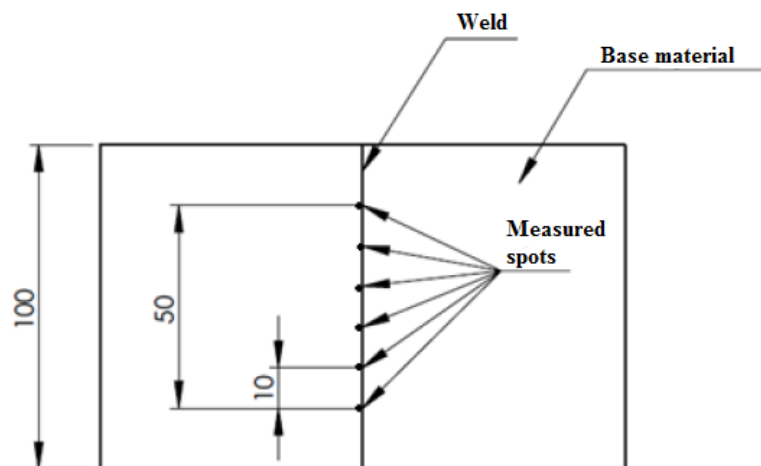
Scheme of measuring the width of surface and root of the weld
